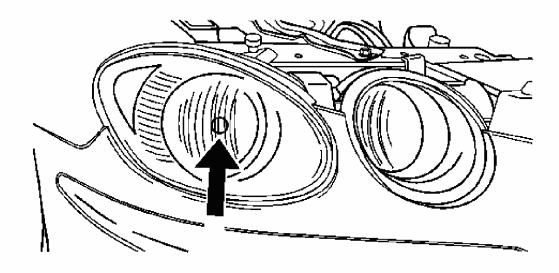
Identifying Headlight Aiming Dot Courtesy of GENERAL MOTORS CORP.
